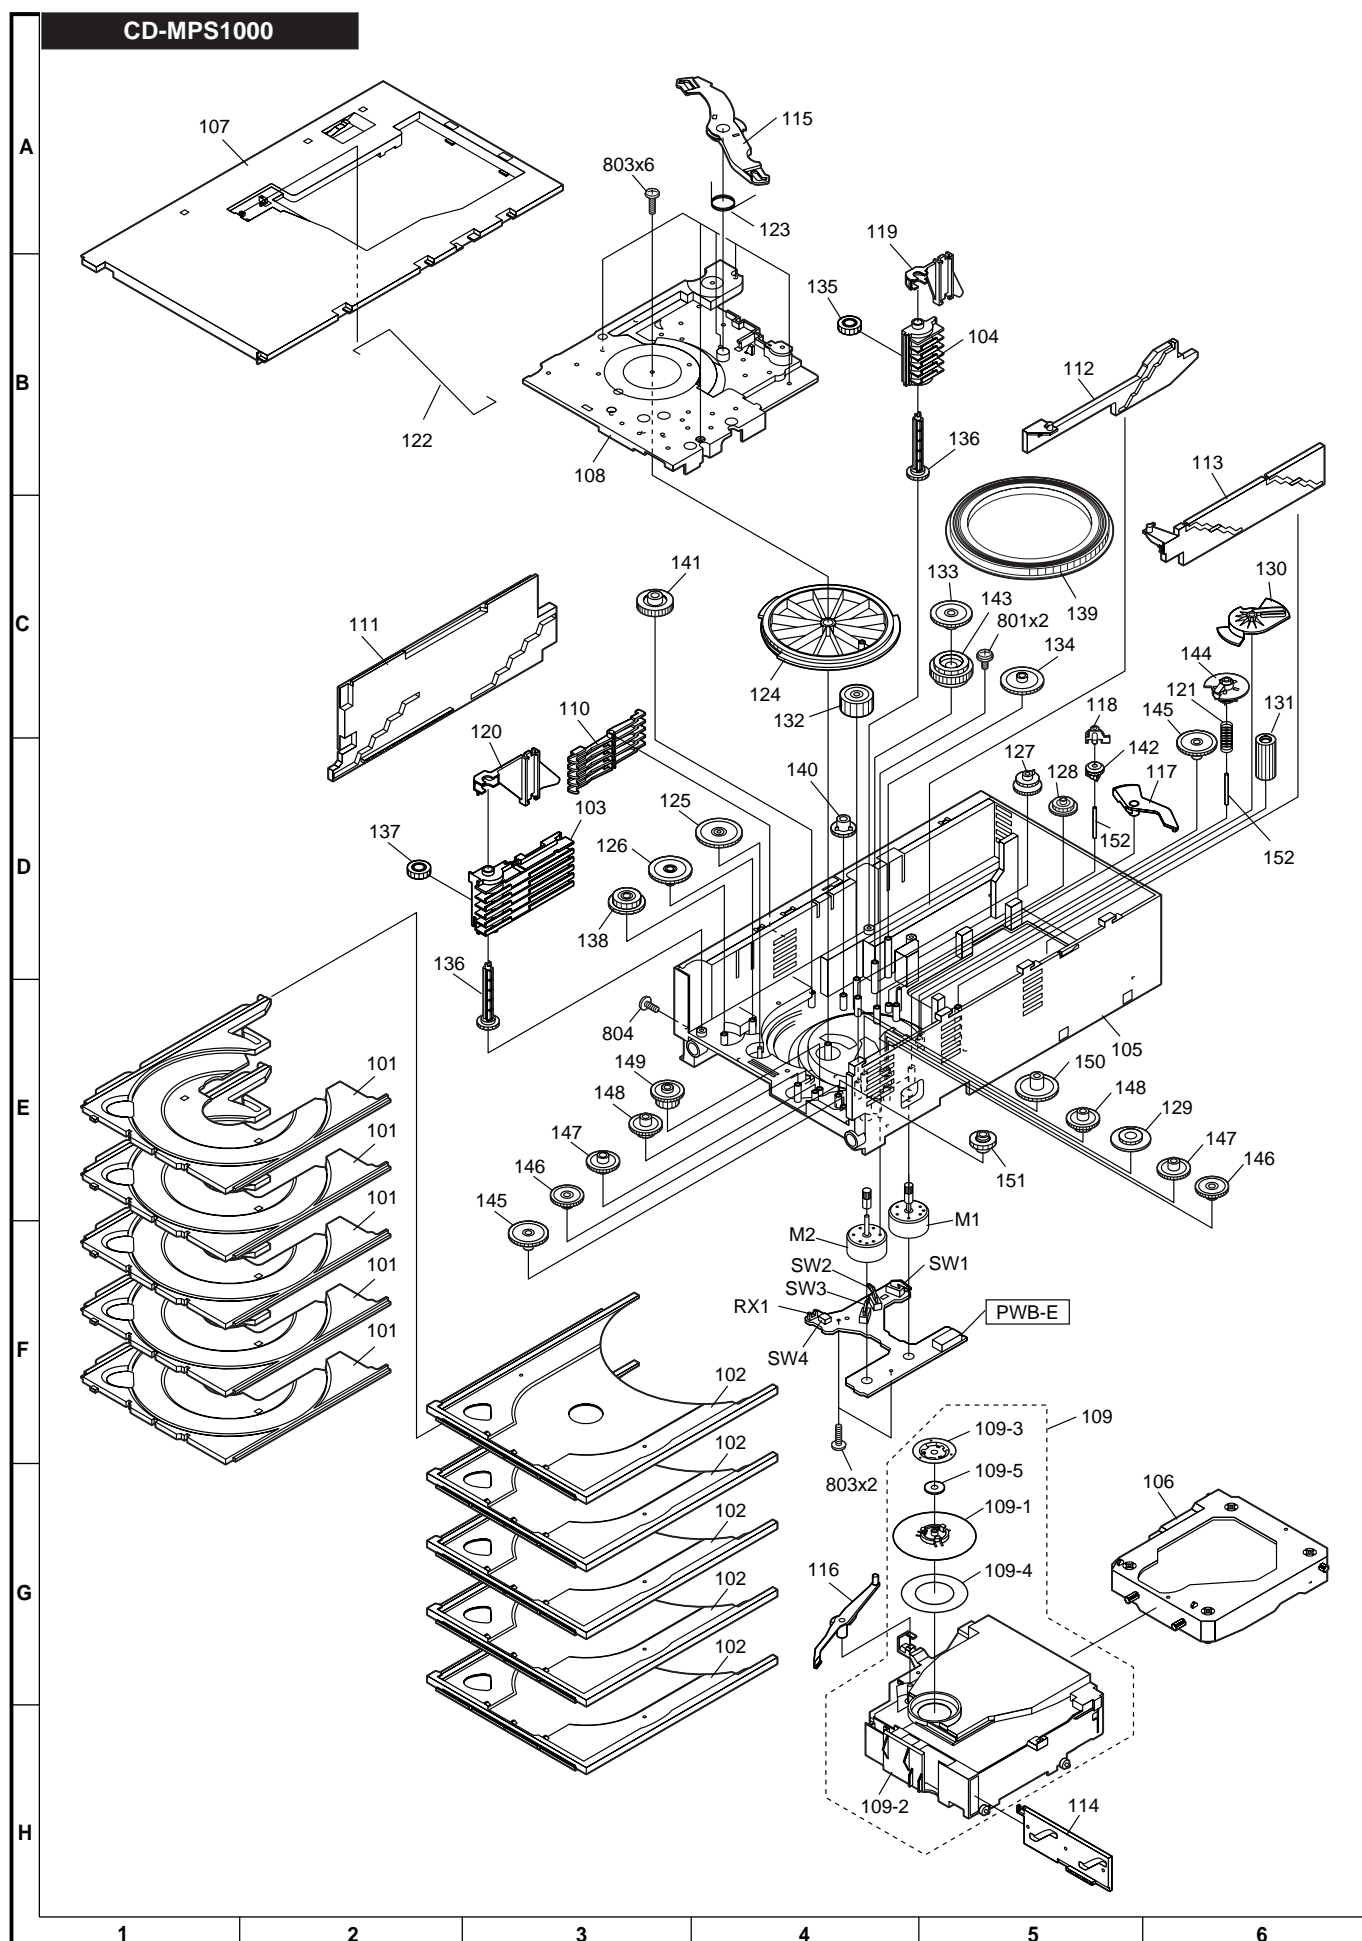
CHANGER MECHANISM EXPLODED VIEW
